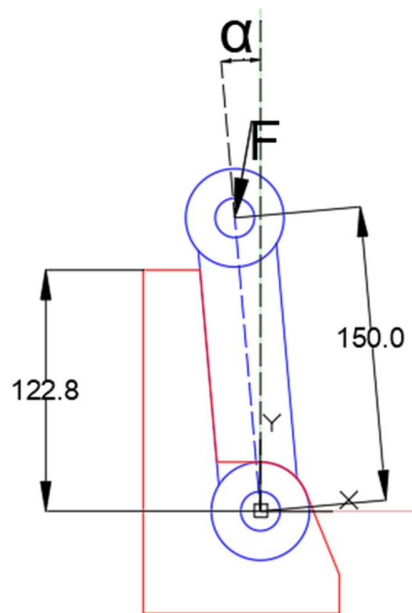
Drawing of the lower leg and the support. Drawn with AutoCAD software
